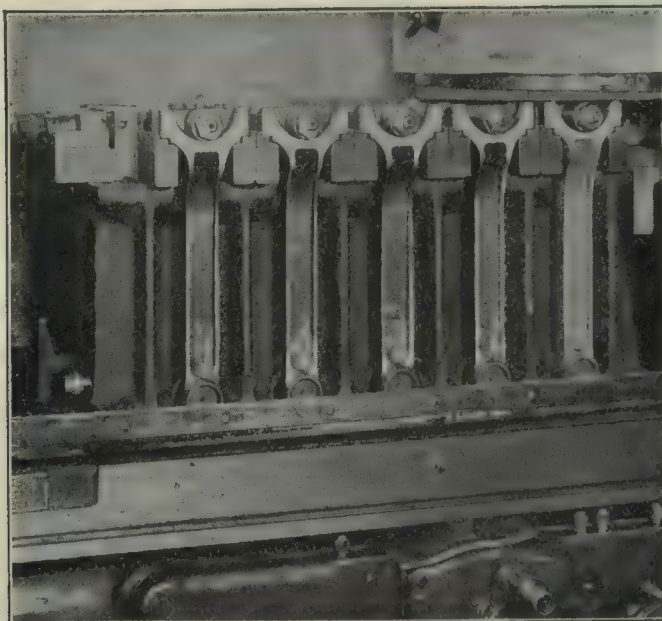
GRIND JOINT FACE OF ROD AND CAP
